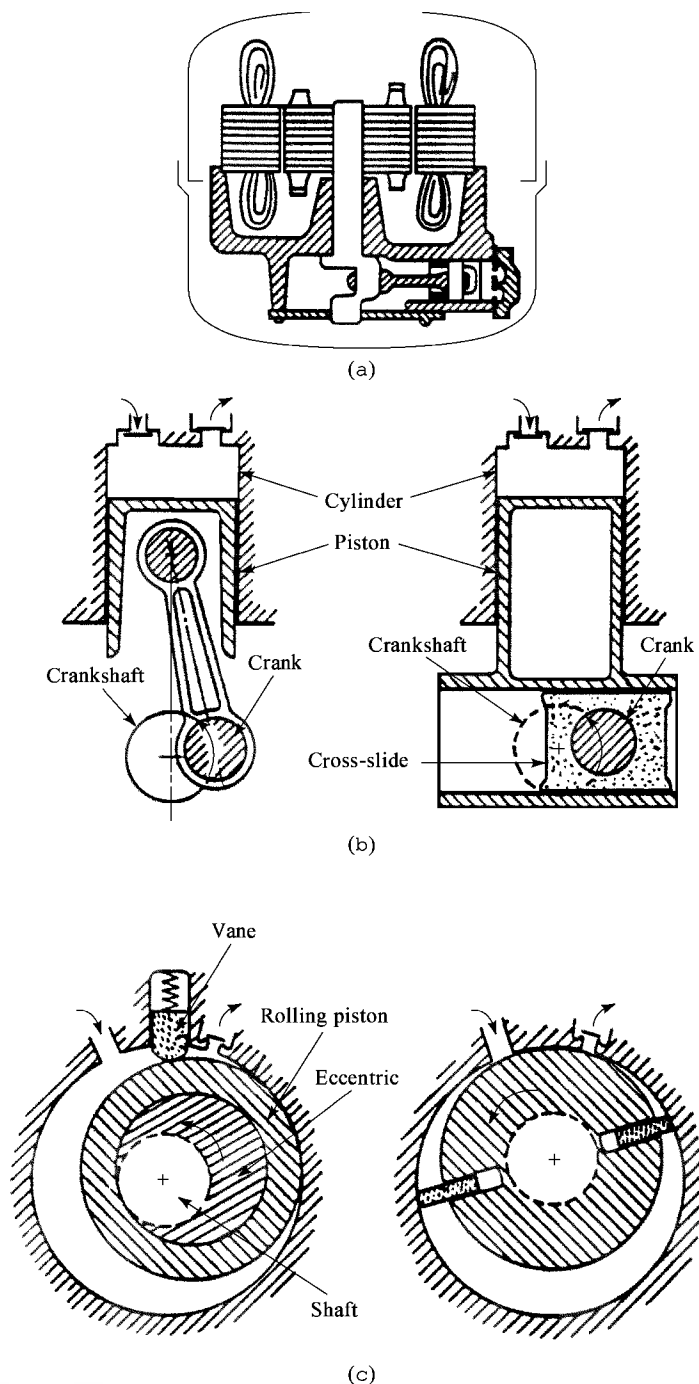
Compressor types used in refrigerator freezers: (a) typical arrangement; (b) reciprocating piston mechanisms: connecting rod and Scotch yoke; and (c) rotary mechanisms: rolling piston and sliding vane.
